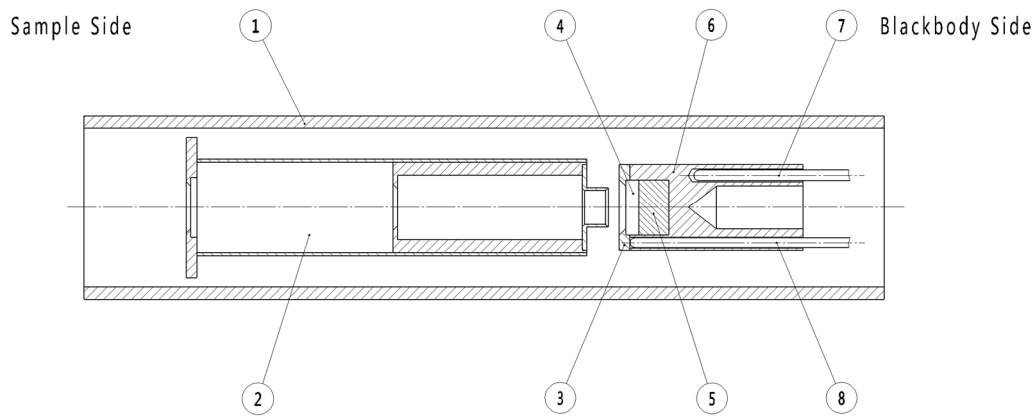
Cross-section diagram of the furnace ceramic tube (top view). Ceramic tube (1); radiation shield (2); sample locking ring (3); sample (4); adjusting block (5); sample-blackbody housing (6); cavity thermocouple (7); sample thermocouple (8).
